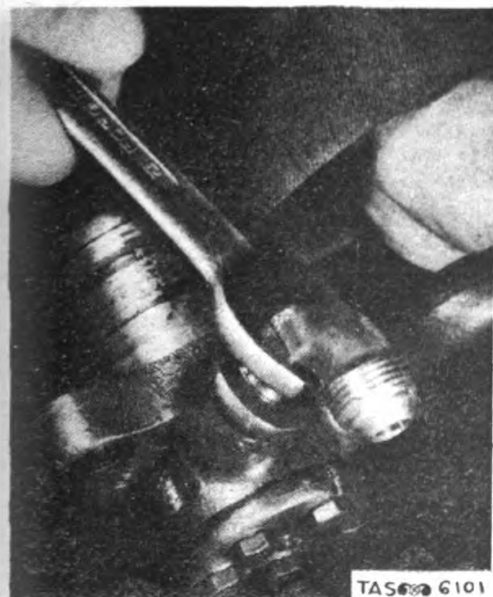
Removing 3/8-Inch Street Elbow from Top of Pump Assembly.
